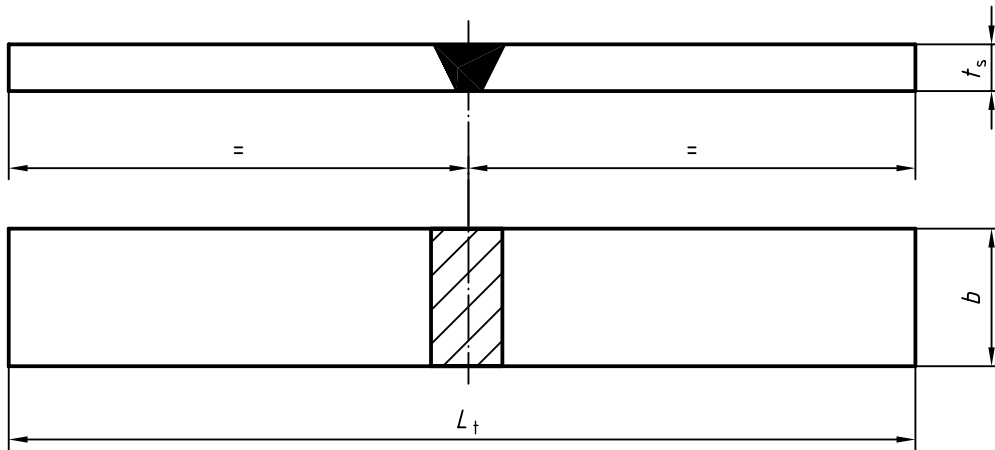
Transverse root and face bend test specimen for a butt weld (RBB and FBB)
